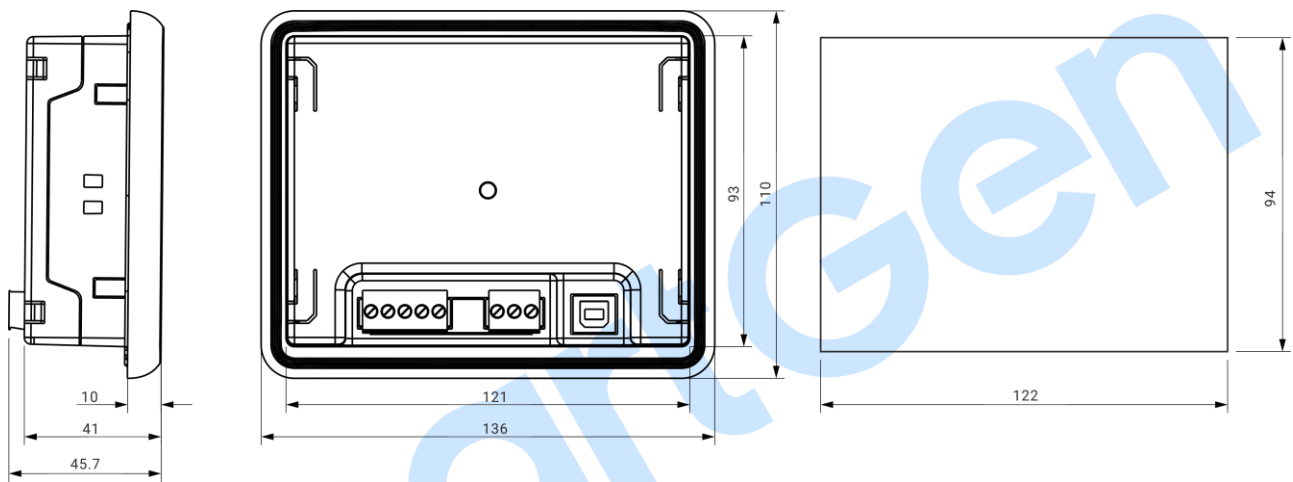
HGM8140ZD Overall and Cutout Dimensions (Unit: mm)
